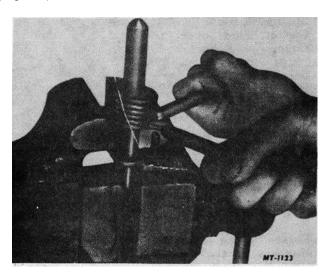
Relieving Torsion Spring Tension ELECTRIC MOTOR
